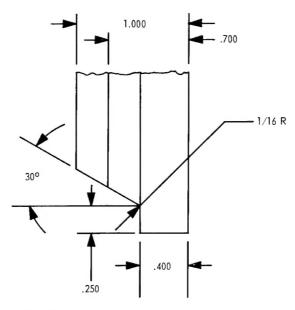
Special weld joint configuration for vertical welding of LOX and fuel tank cylindrical skin segments.
